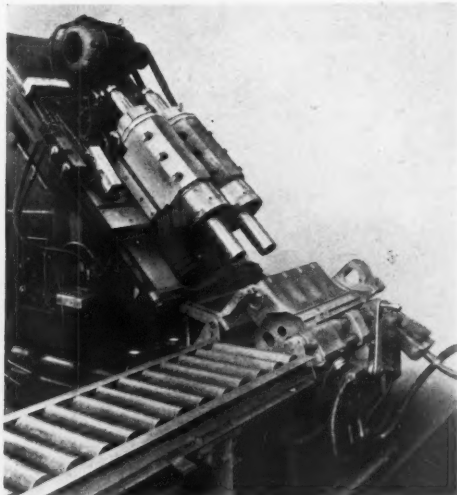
The cylinder block in the boring position on the machine shown in Fig. 16
